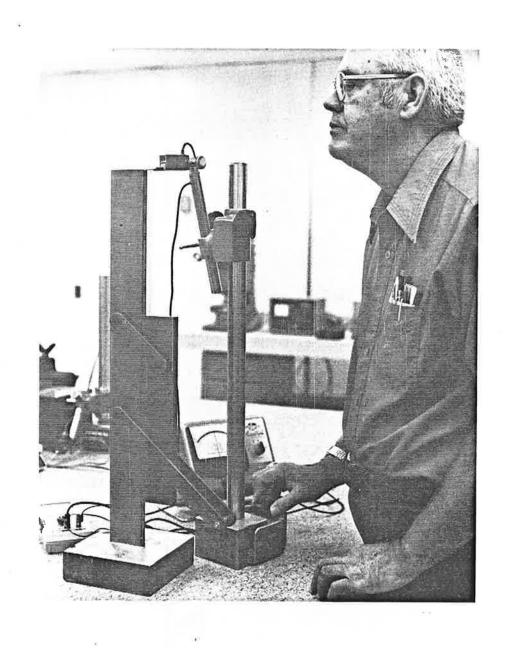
MEASUREMENT OF FINAL MEIER ROD LENGTH IN HOLDING FIXTURE
